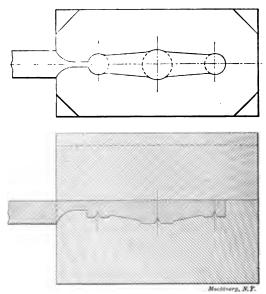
Example of Forging Die Forming Center Holes in the Bosses of the Work
